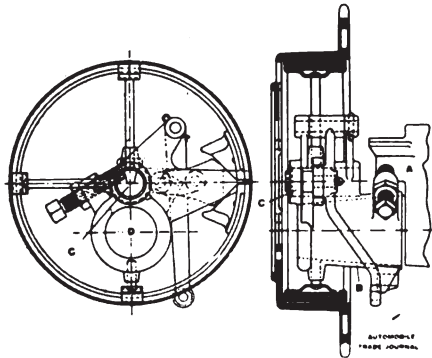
Brush rear axle end, brake drum and sprocket chain adjuster, brake shoe and bearing mechanism.
